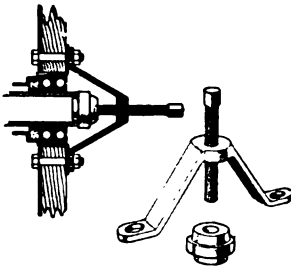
Bearing wheel puller: This puller is used to remove the rear wheels of the Buick. The wheel flange and axle are removed and the puller bolted to the flange bolts. A steel button is then placed in the rear axle tube, and the pressure applied by the central screw. By having several sizes of steel buttons, and making the flange bolt holes oval, this puller may be used on many cars.
